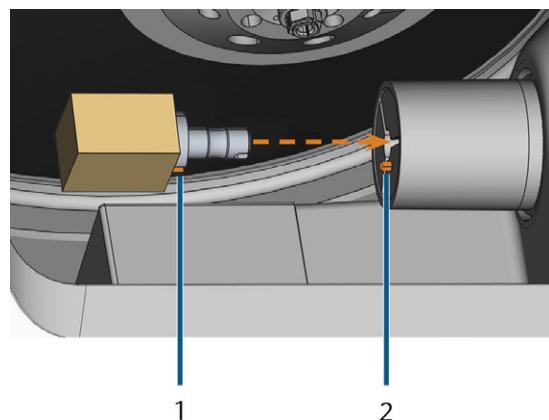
INSERTING THE BLOCK INTO THE BLOCK HOLDER (GROOVE AND POSITIONING PIN MARKED ORANGE)
